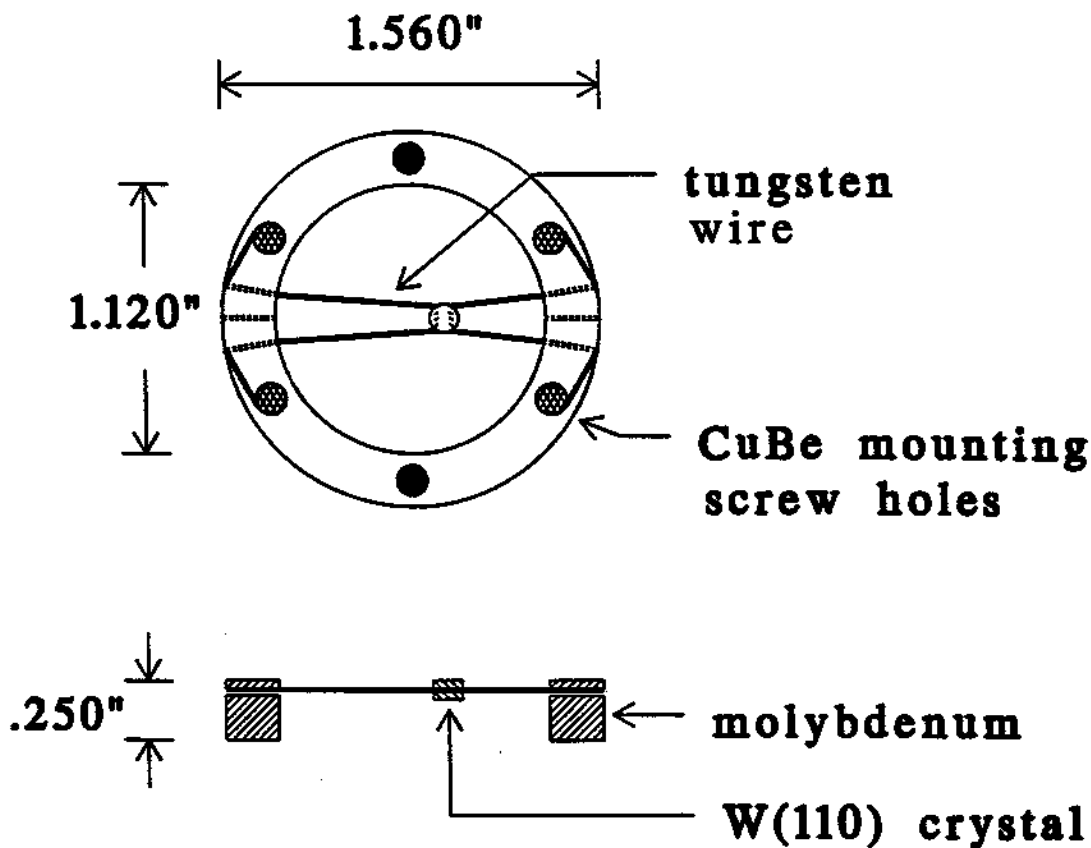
Top view and side view of tungsten crystal and mounting jig.
